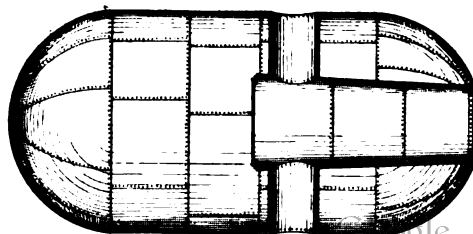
Cornish Boiler exploded from collapse of tube through want of strengthening rings.
